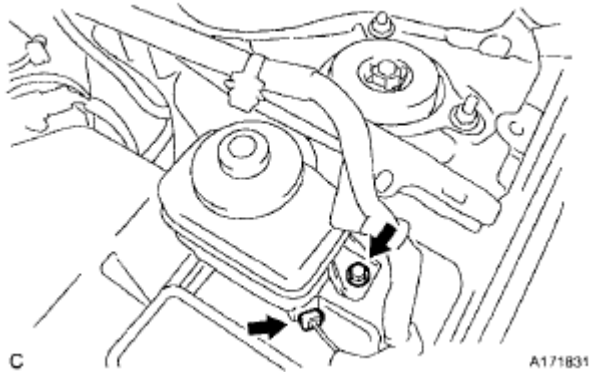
Locating Level Warning Switch Connector And Brake Master Cylinder Reservoir Assembly Bolt
